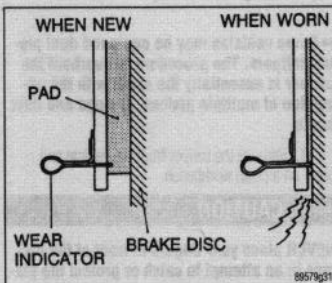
The disc brake pads have wear indicators which will make a squeaking noise when the pads become worn and need to be replaced
